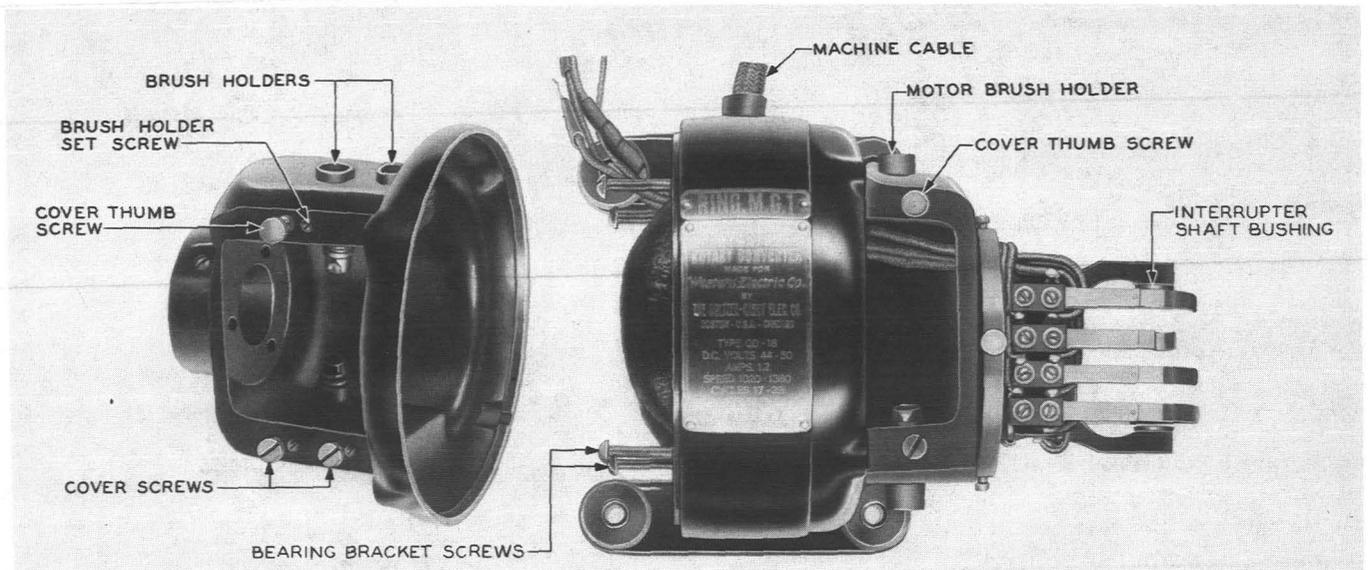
Ringing Machine Frame Assembly (Holtzer-Cabot Machines)
